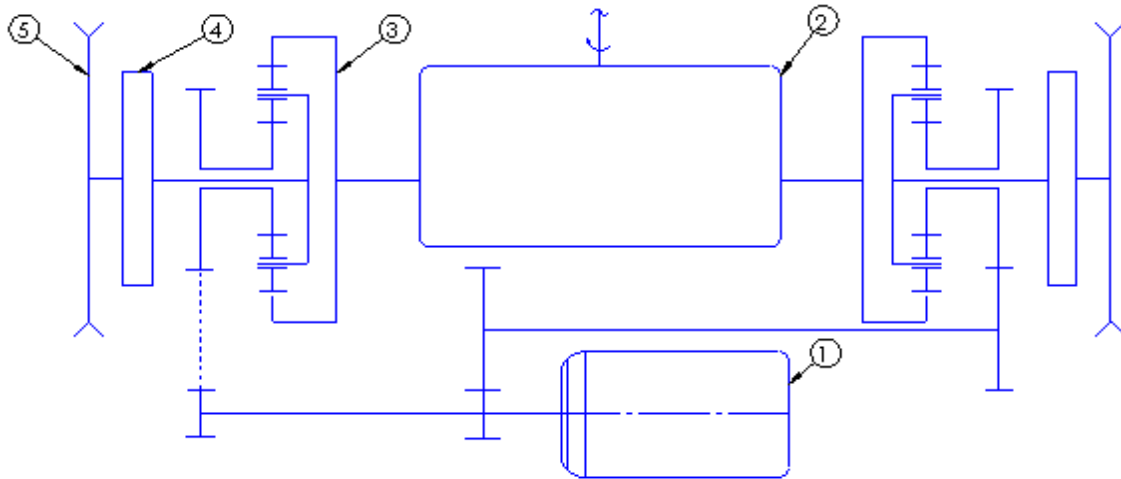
Kinematic scheme of transmission with one electric motor and the sun gears of the summation planetary rows of different sides, rotating in opposite directions: 1 – Electric drive; 2 – Gearbox; 3 – Summation planetary rows; 4 – Final drives; 5 – Driving wheels
